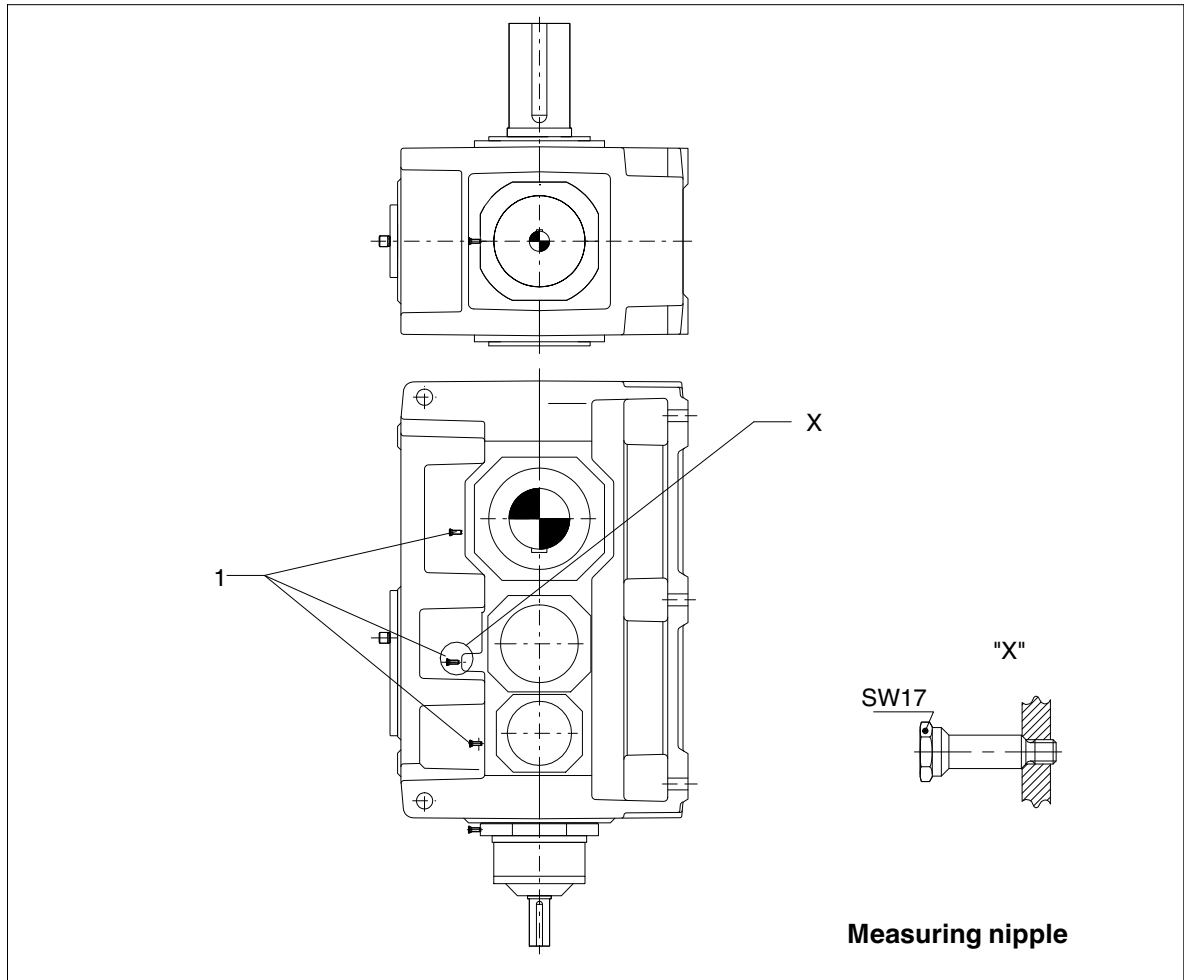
Bearing monitoring by shock-pulse transducer on gear units type B3.V
